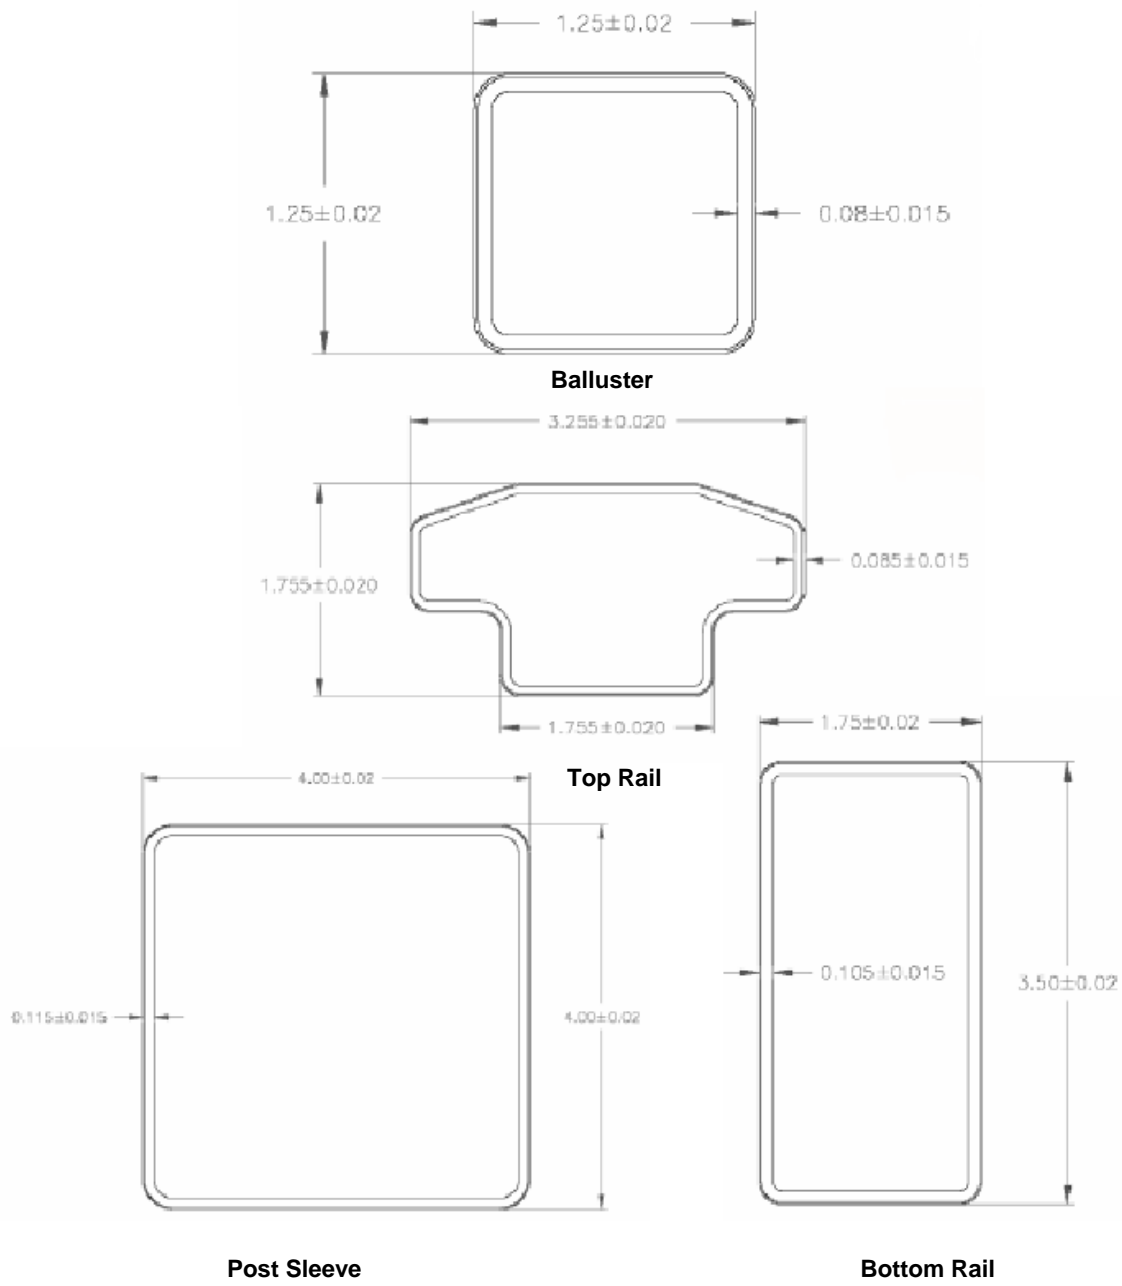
PLASTIC PROFILES OF TOP AND BOTTOM RAIL, BOTTOM RAIL SUPPORT MOUNT, POST SLEEVE AND BALUSTER (dimensions in inches)
